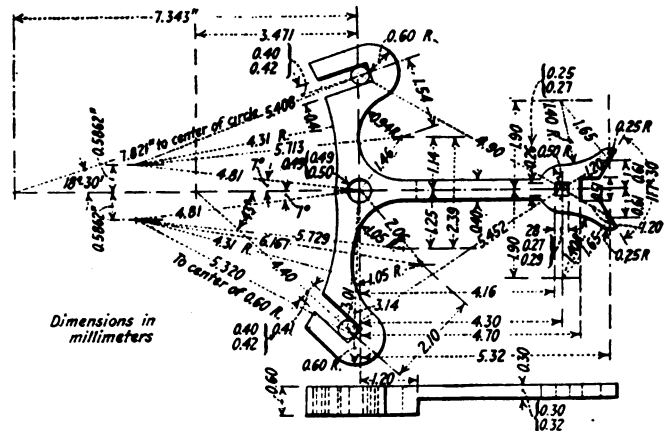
DRAWING OF PALLET. DIMENSIONS IN MILLIMETERS
